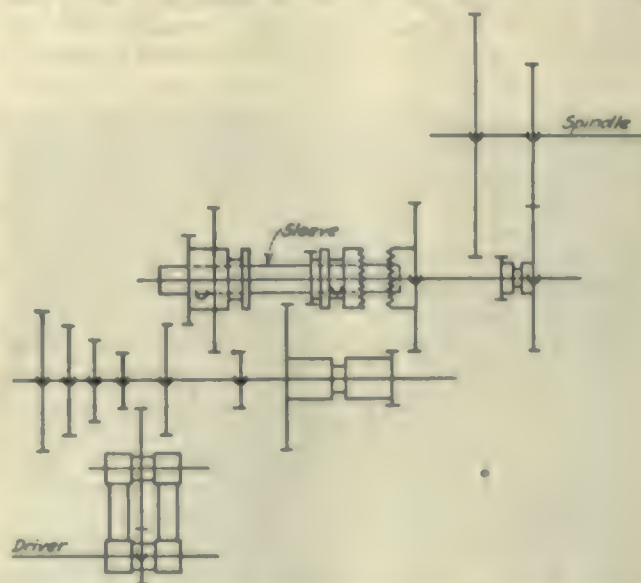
FURTHER MODIFICATION OF LATHE DRIVE
